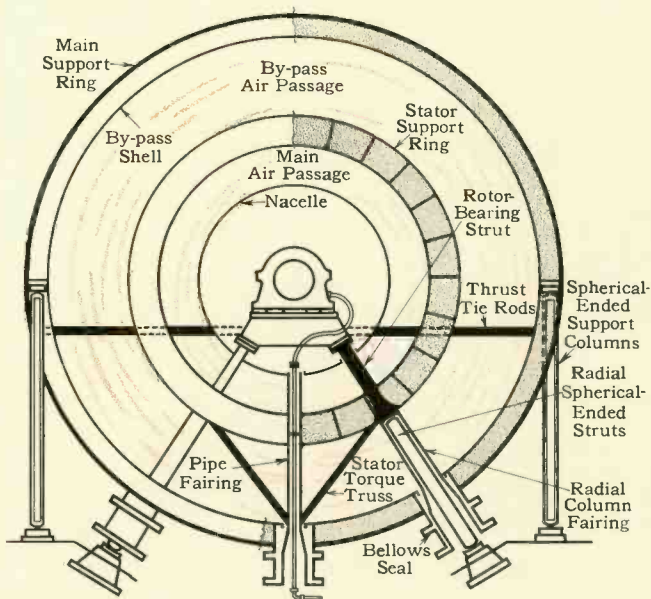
Parts of the supporting structure are shown in this cross section of the supersonic compressor.
